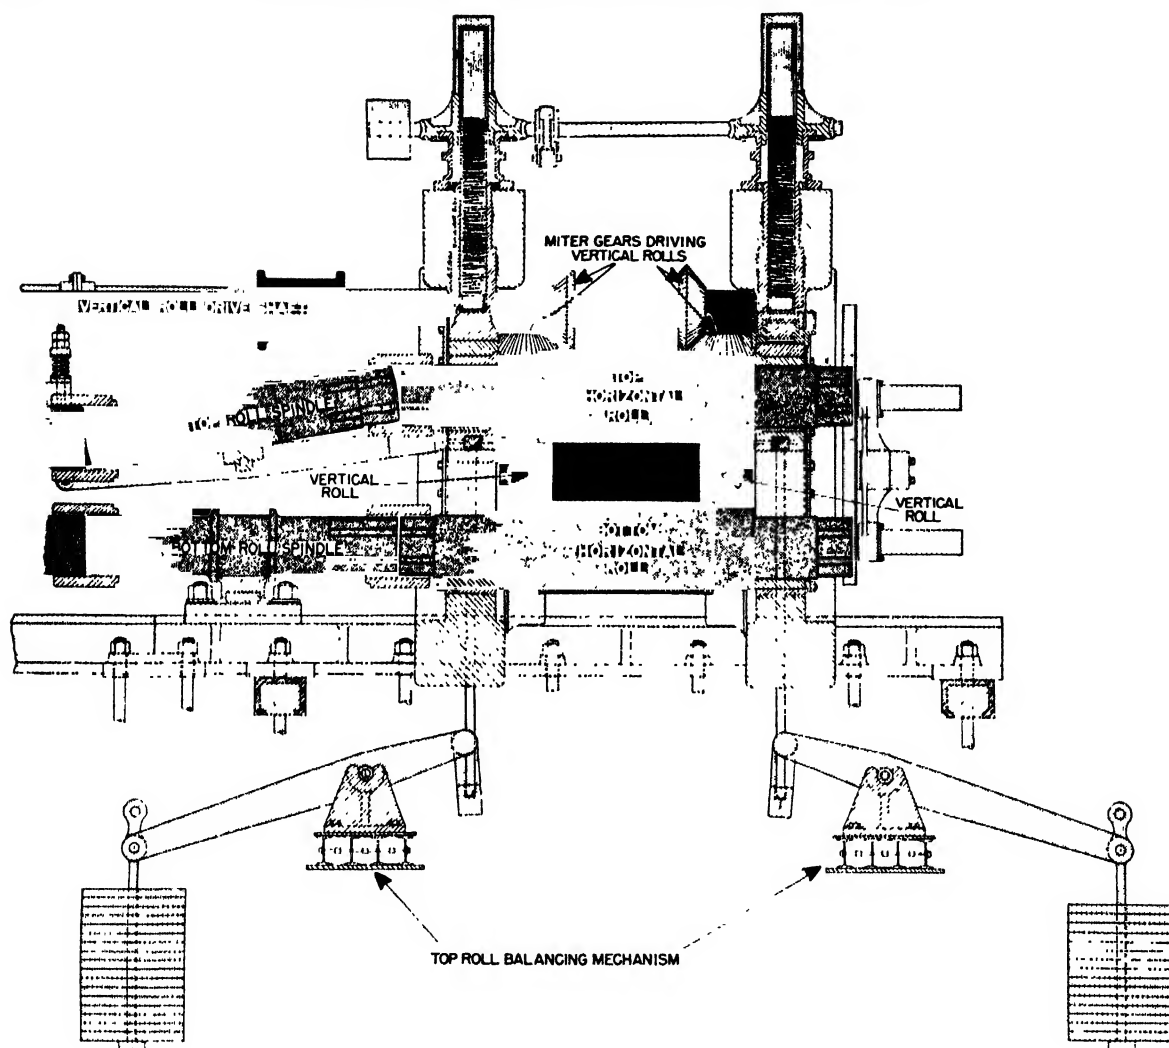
2. Diagrammatic layout of the principal parts of a universal mill for rolling plates.
